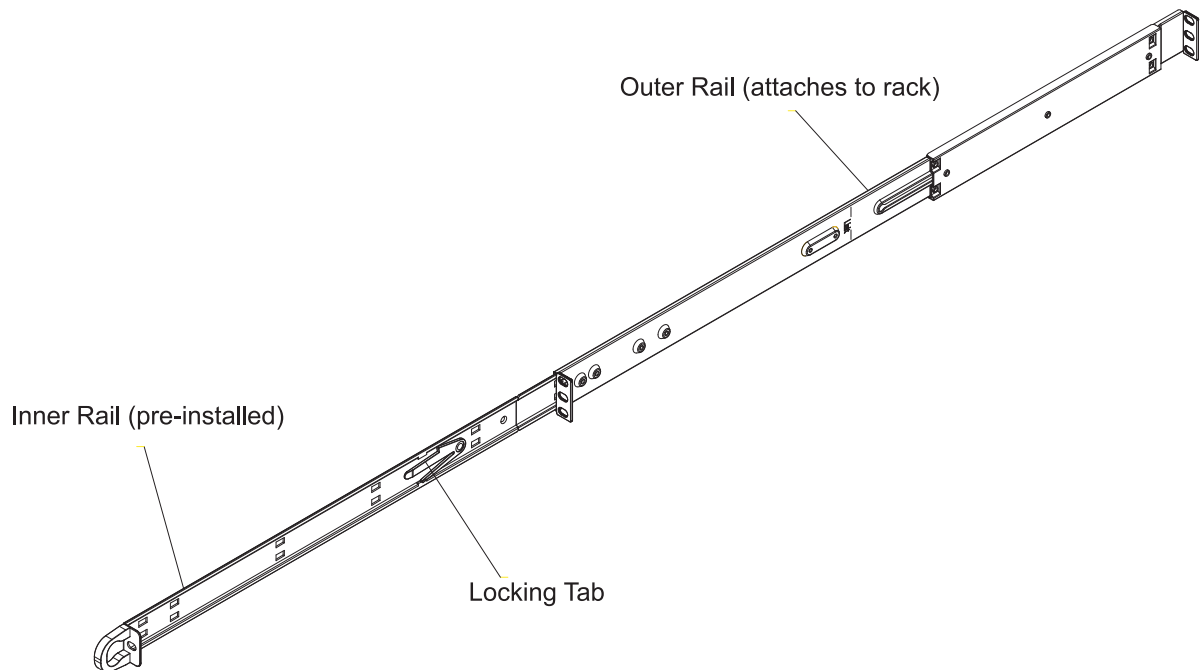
Sections of the Rack Rails (right-side rail shown)
